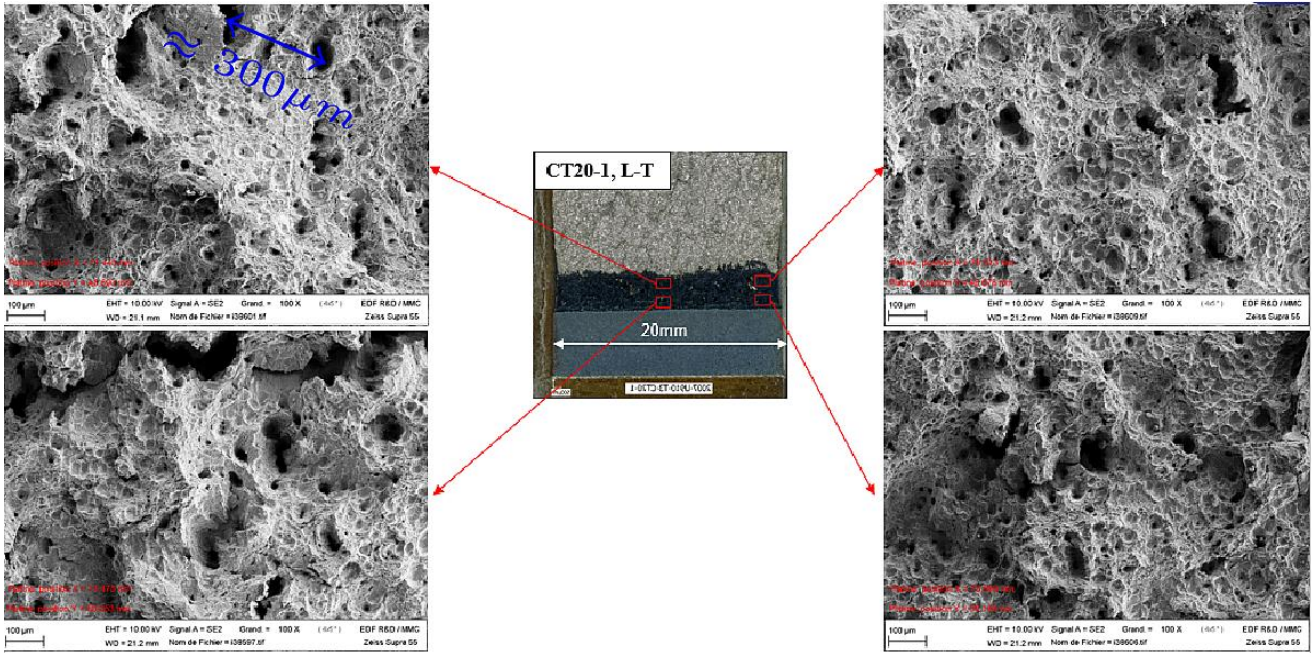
Fracture surface at the center and on the two sides of CT20-1 specimen
